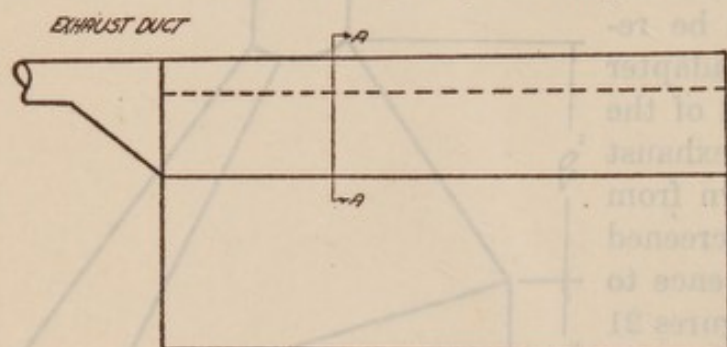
Schematic drawing of hood used on American type blowing machines.
